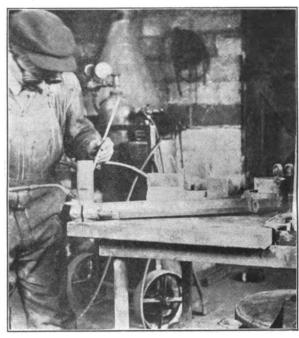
Spot Welding the Severed Part of the Connecting Rod.
